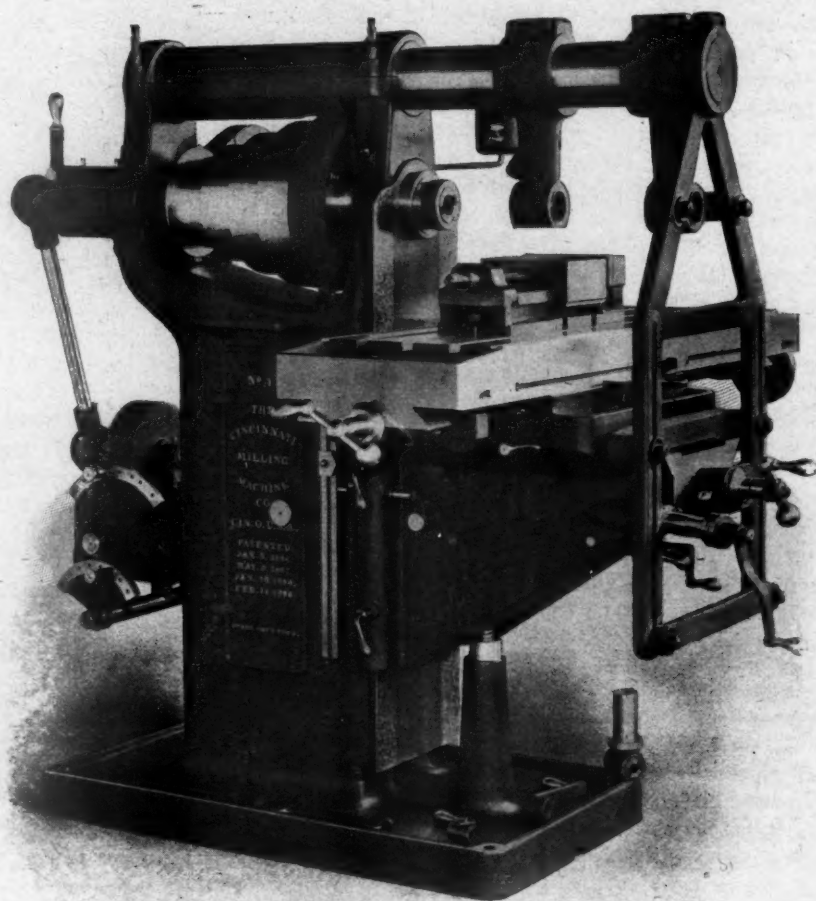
NO. 4 PLAIN CINCINNATI MILLING MACHINE.
